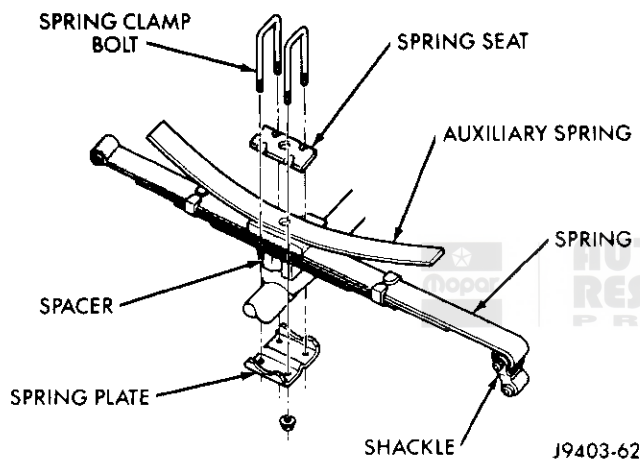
Rear Spring—Cab-Chassis 11000 GVW
